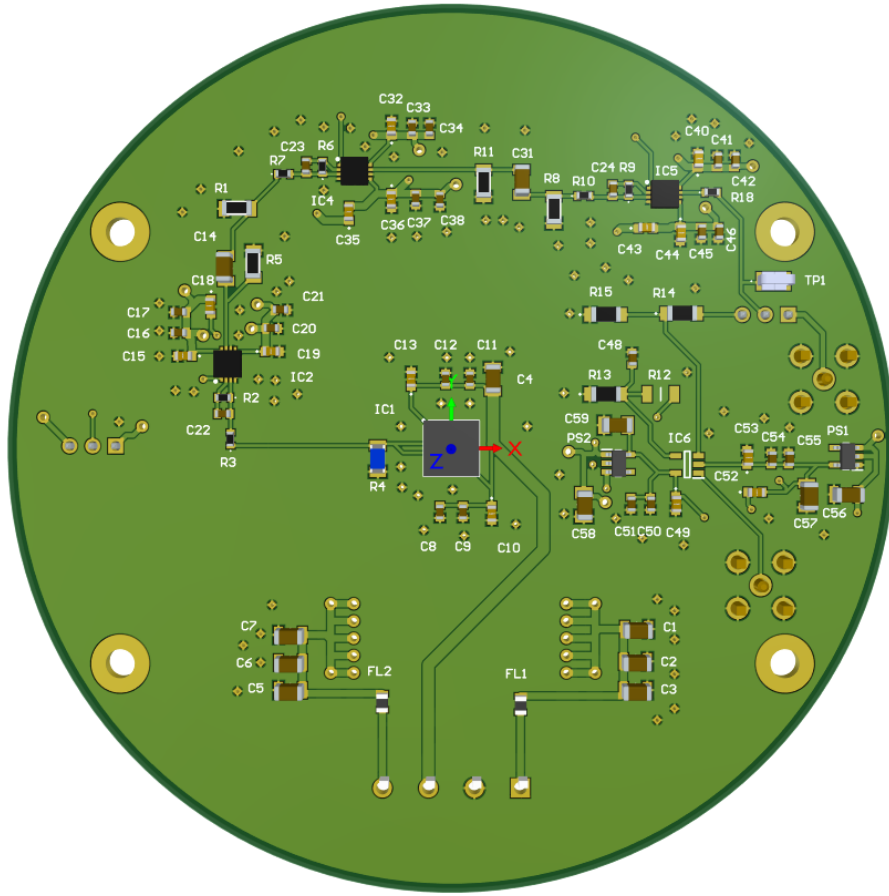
3D image of the final UWOCS receiver PCB.
